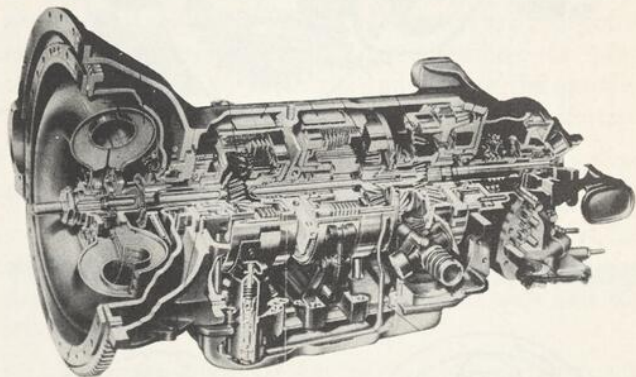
GEAR BOX—SECTIONAL VIEW.
